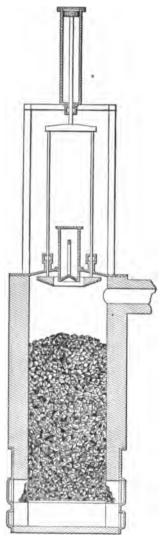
Section of Fuel Gas and Electric Enginmering Co.'s Gas-Producer.
